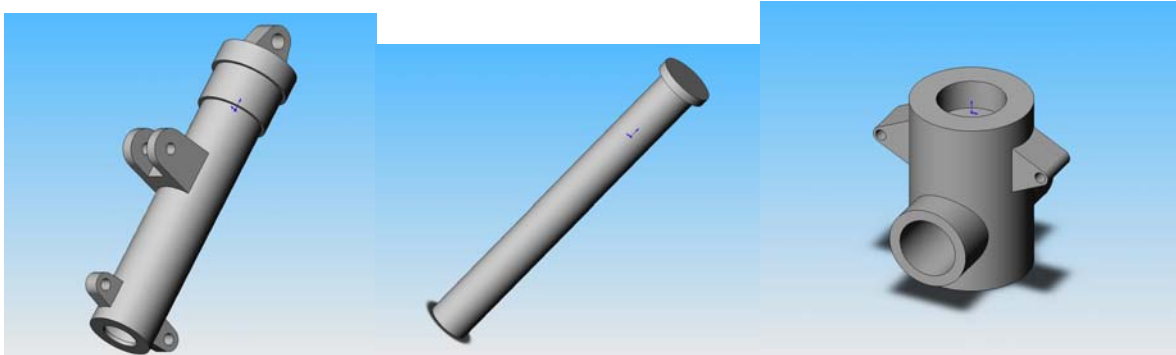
Component Views of the Oleo Strut, Piston and Wheel hub
